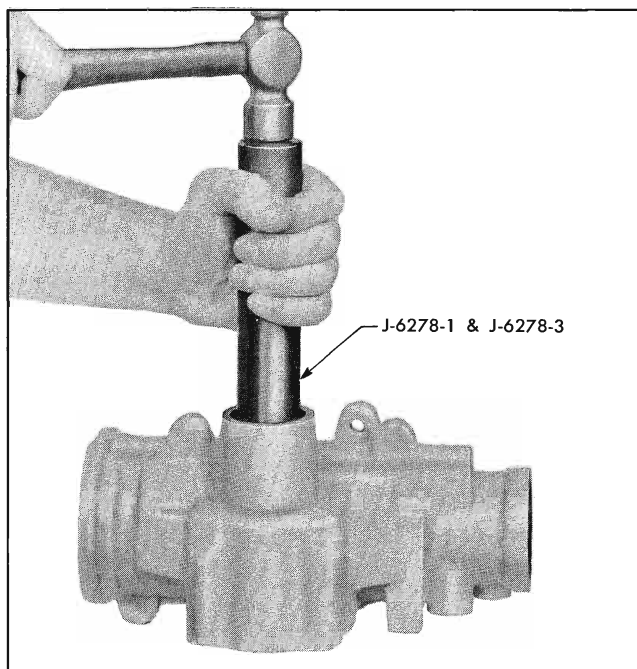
A-25 Installing Pitman Shaft Needle Bearing
